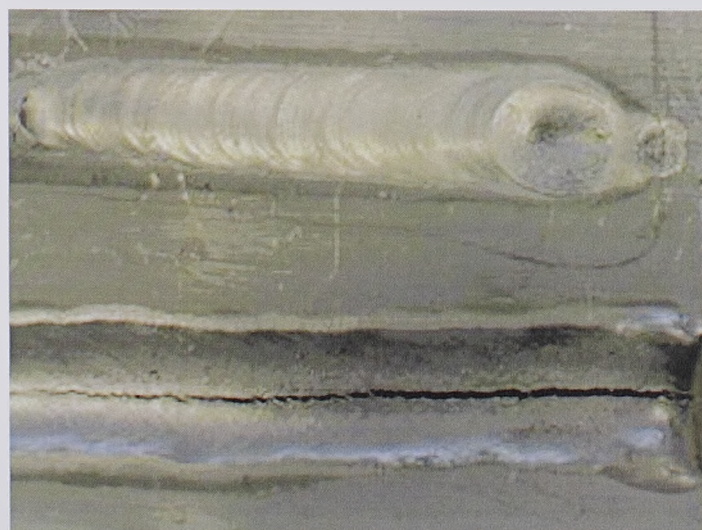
Hot crack in welded joint.<sup>[80]</sup>
